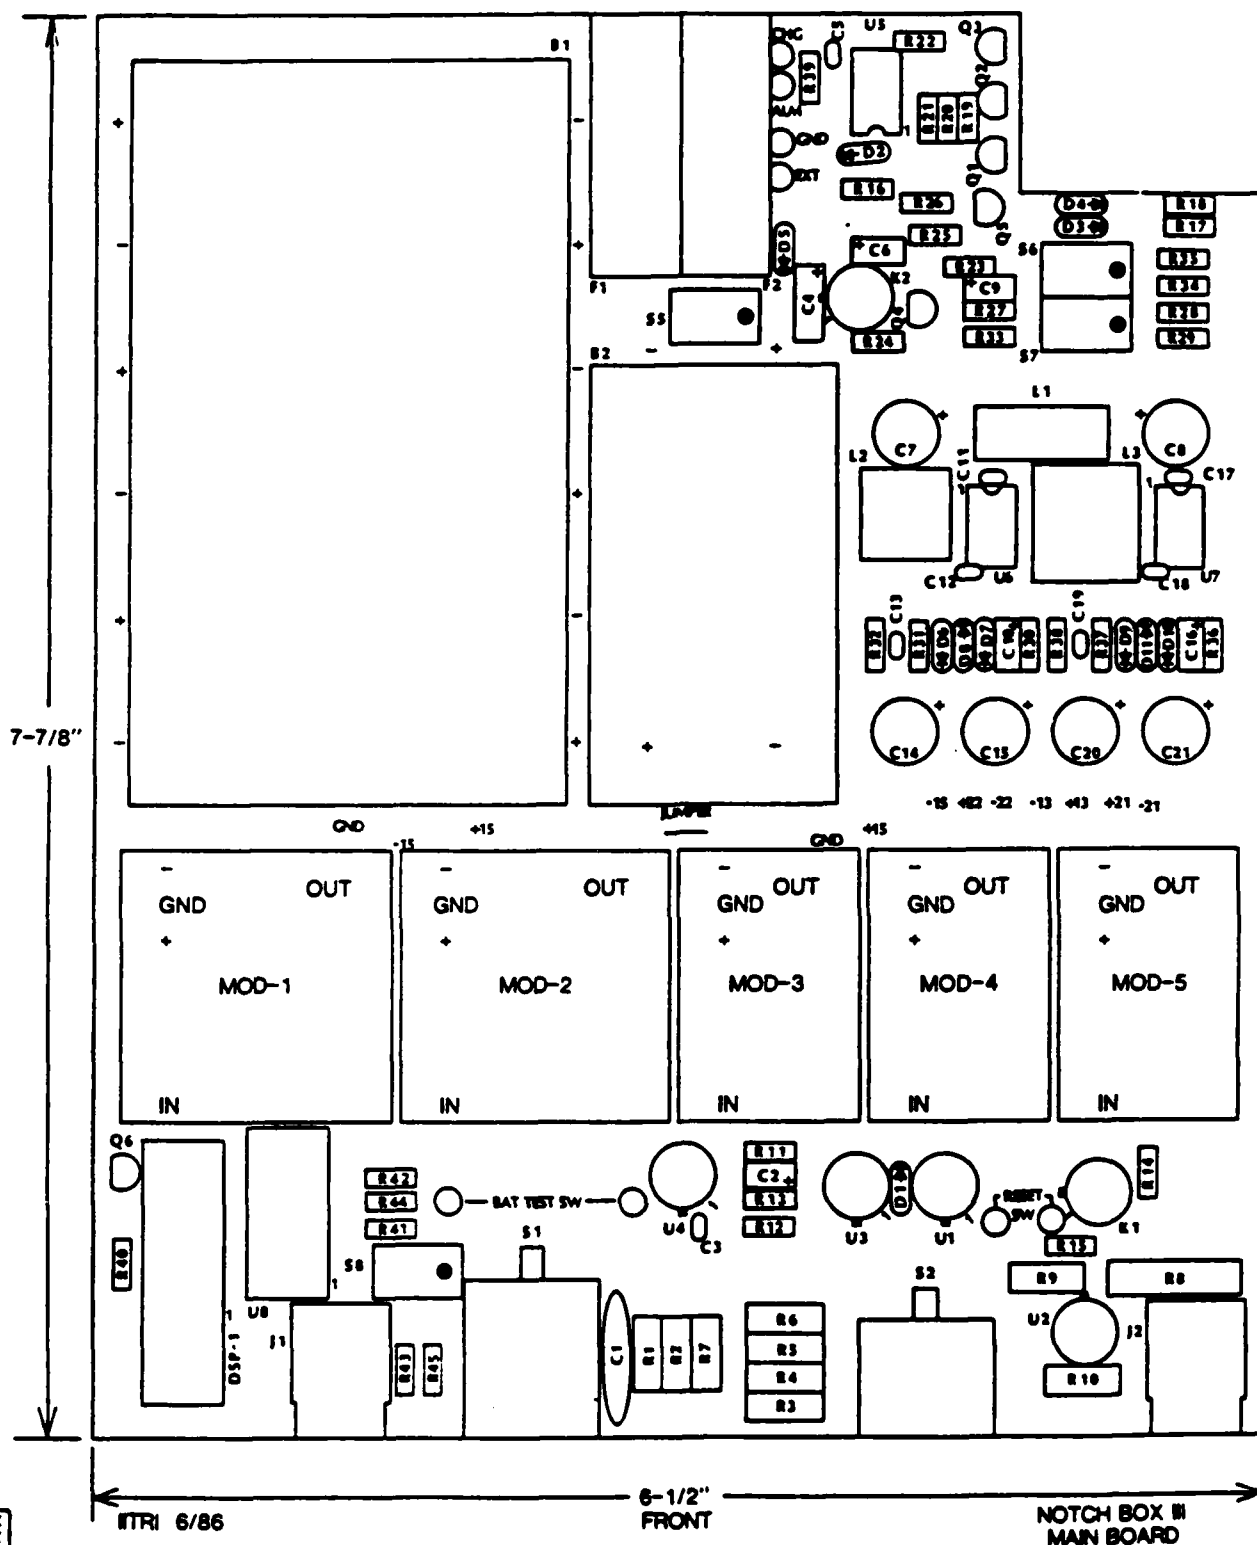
NOTCH BOX III MAIN PC BOARD, COMPONENT LAYOUT.
